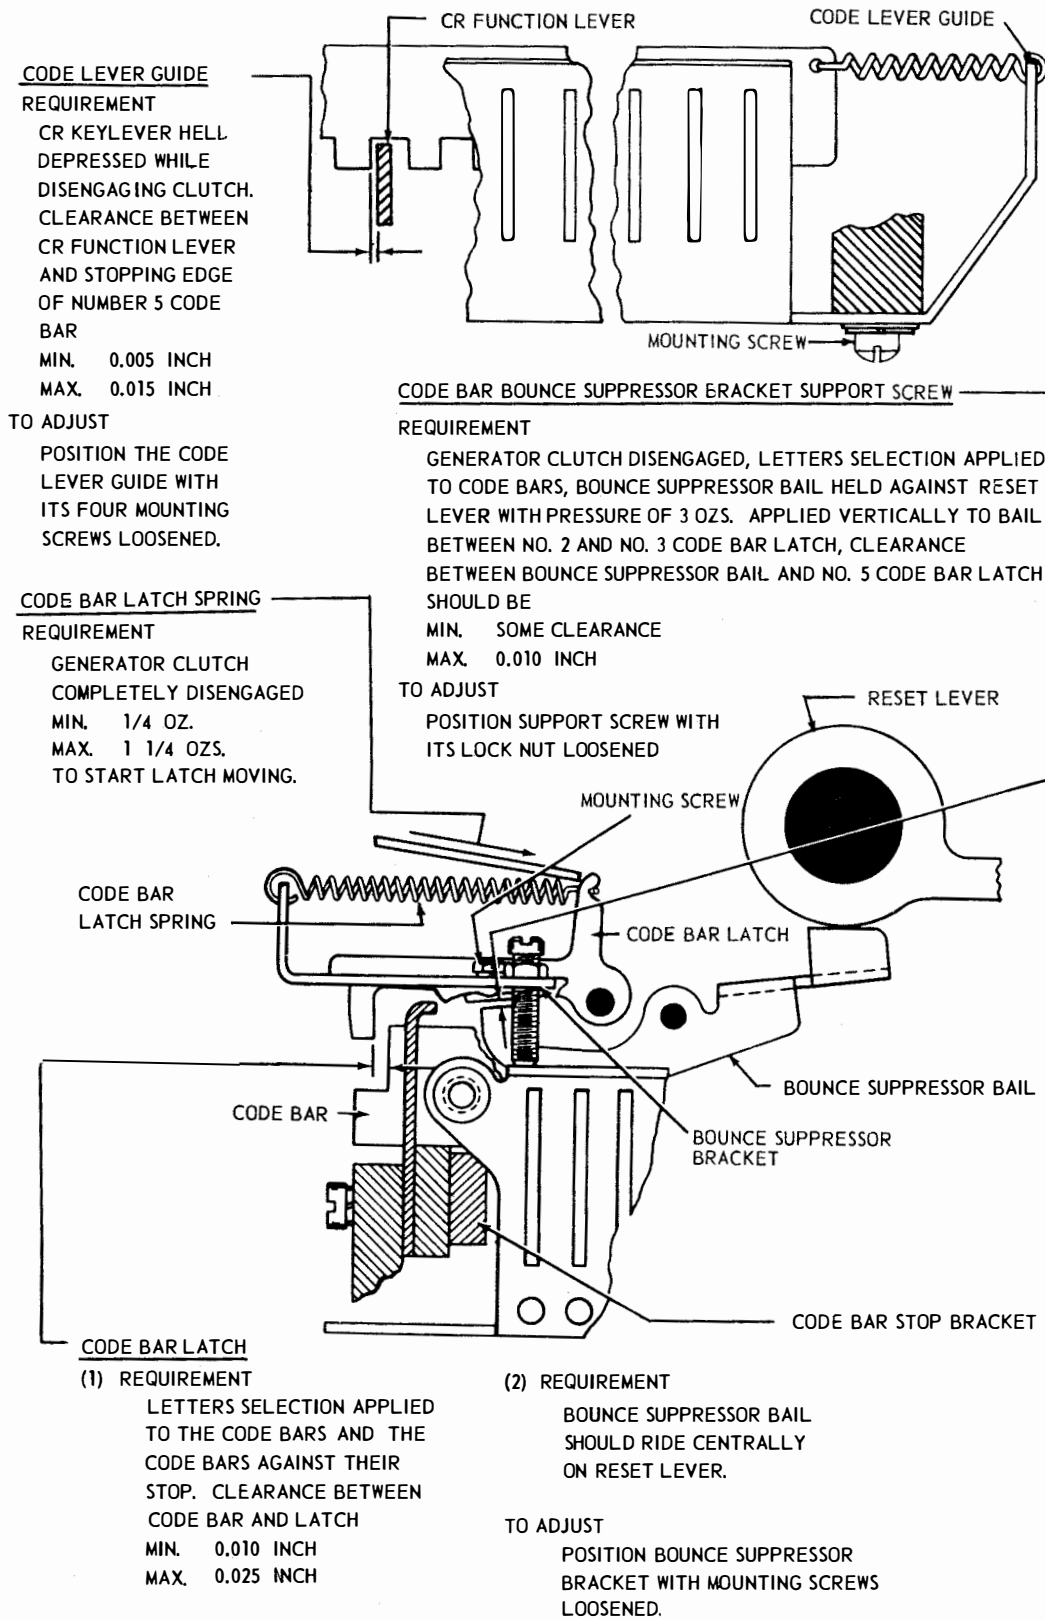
Keyboard, Code Bar Mechanism, Front View
